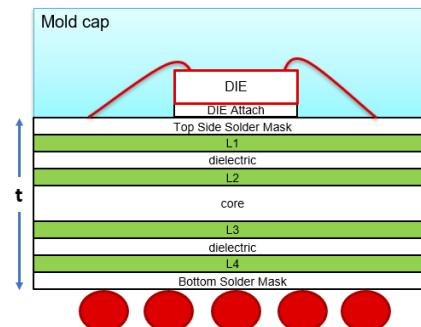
Stack-up of a 4-layer substrate on a BGA Package
